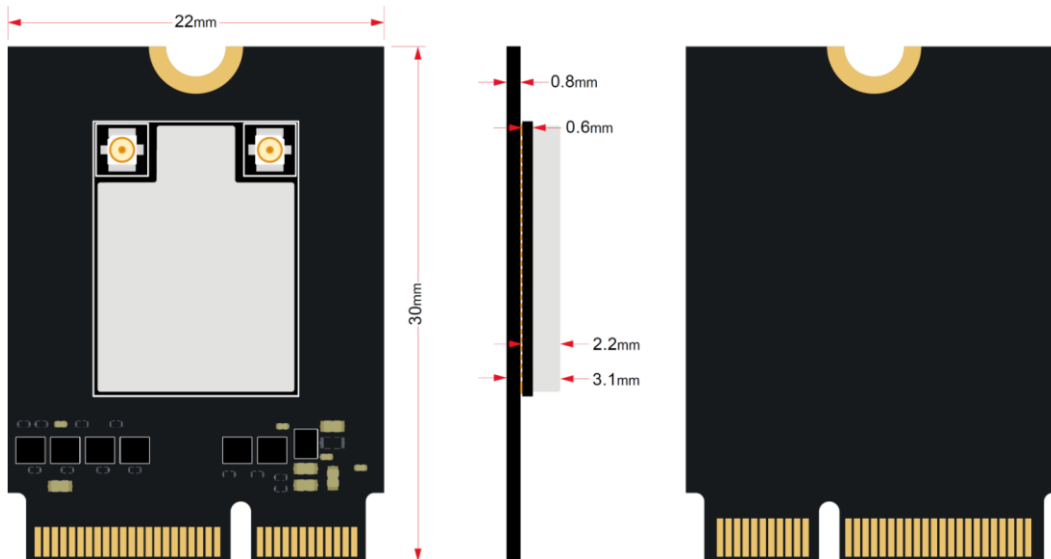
M.2 Key E 2230 Carrier Board with M.2 Soldered-down Type 1216 module
